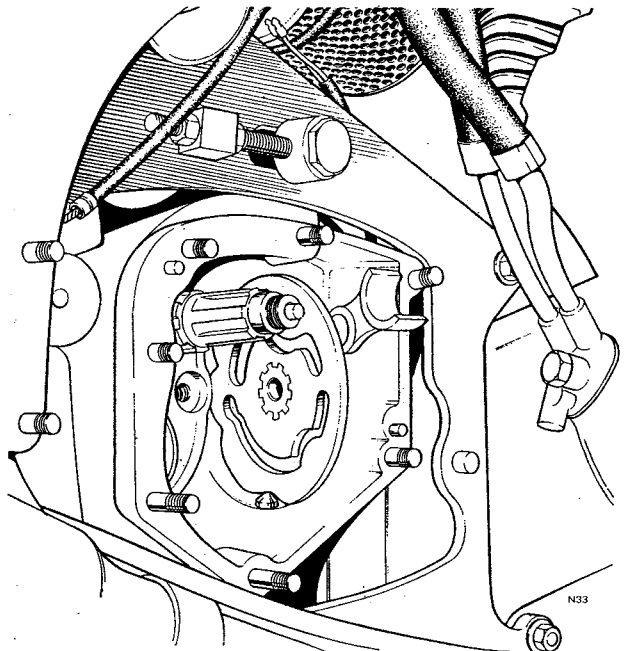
When reassembling gearbox, knuckle end of quadrant must be in line with the top right hand stud of the gearbox shell. This will ensure correct 'timing' of gears
